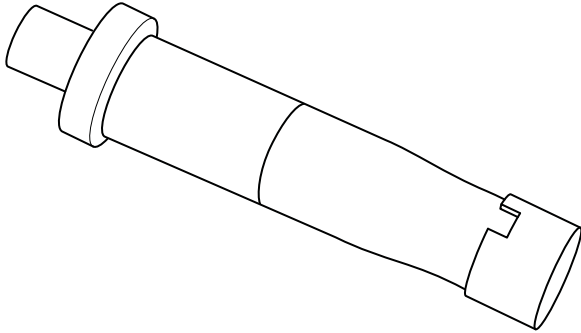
Needle Bush Pressing Tool (332/Y4023)
